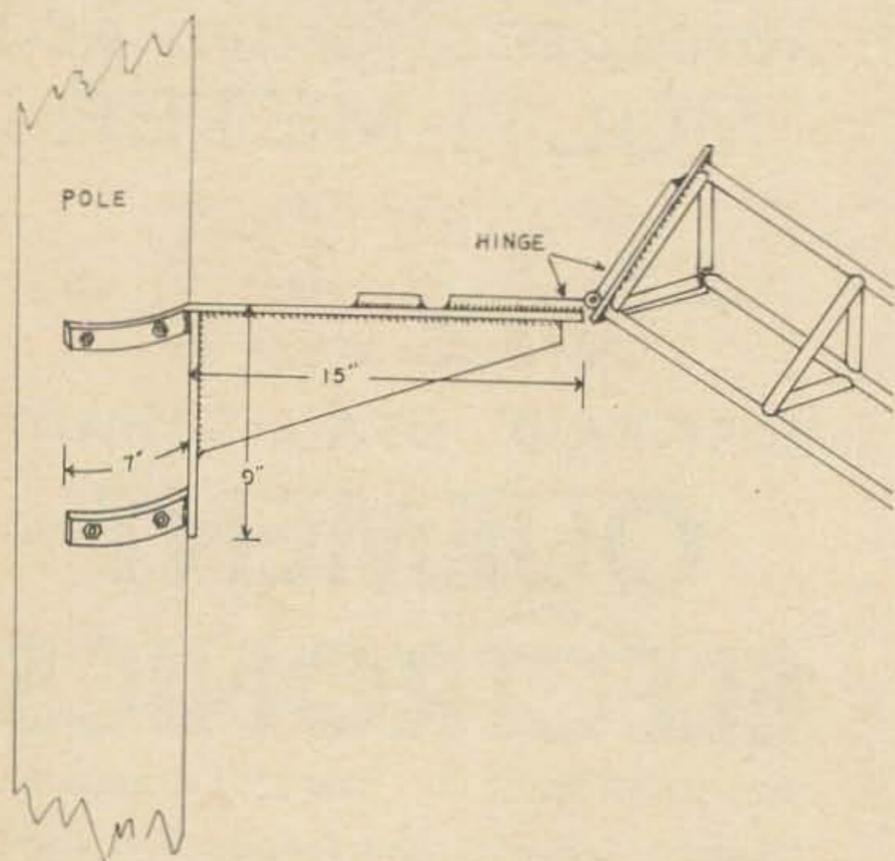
Base plate assembly. All $\frac{3}{8}$ steel plate, electric arc welded.
